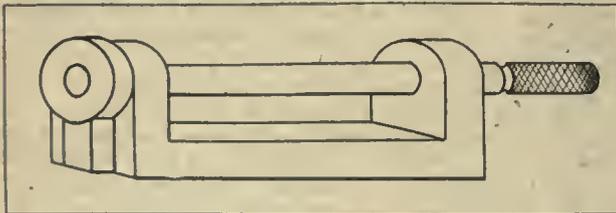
FIXTURE FOR TESTING MASTER TYPE.
